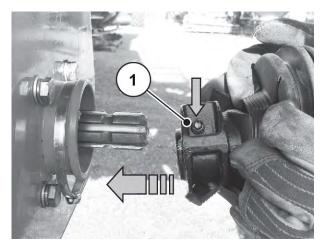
Pushing the universal drive shaft onto the transmission spigot
